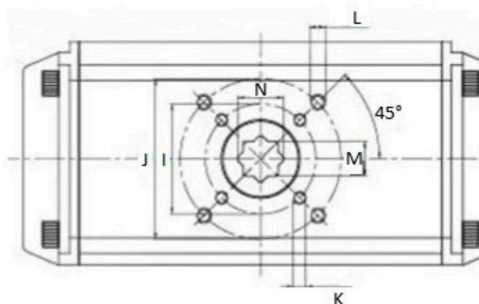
Bottom mount flange (I, J, K, L, M, N).
